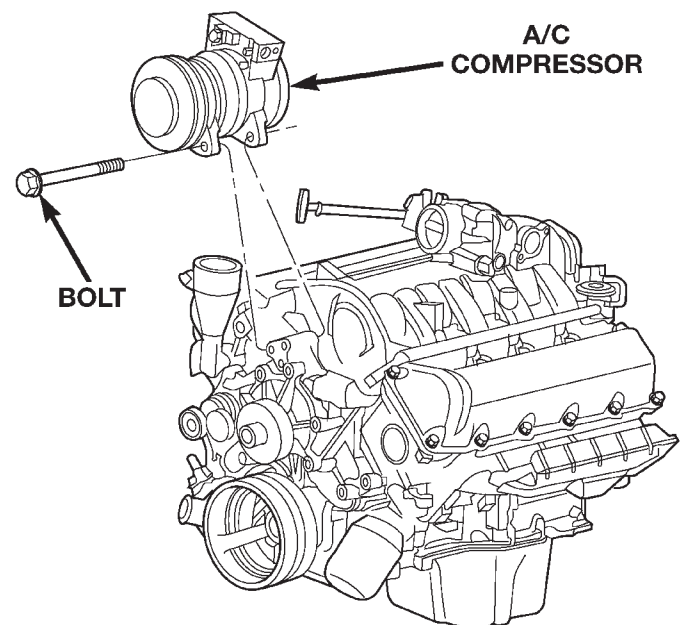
Compressor Remove/Install - V8 Engine - Left View
